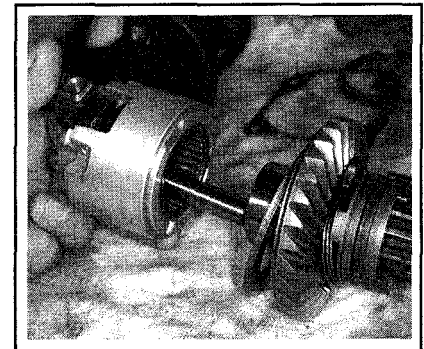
Remove the shift bearing housing assembly from the shaft...
